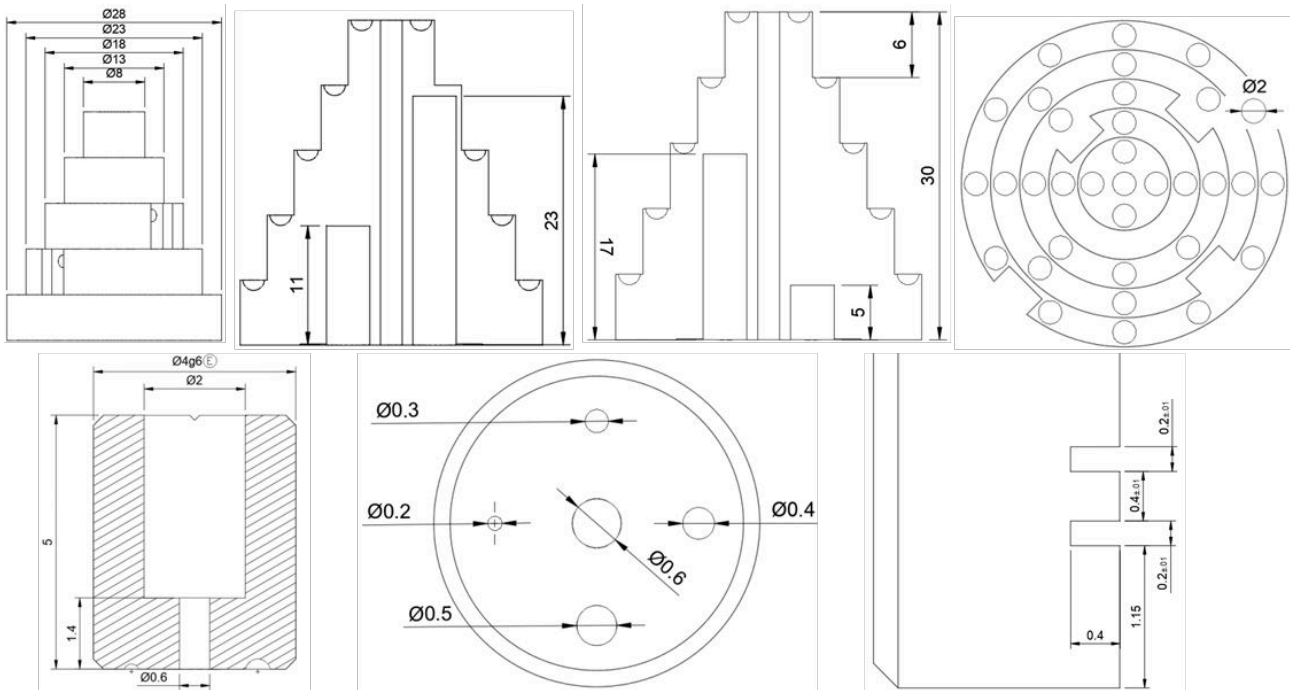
Dimensions of the new standard. Top: side and top views of the global shape. Bottom left: side view of the internal plug. Bottom center: top view of the internal plug. Bottom right: side view of the external insert.
